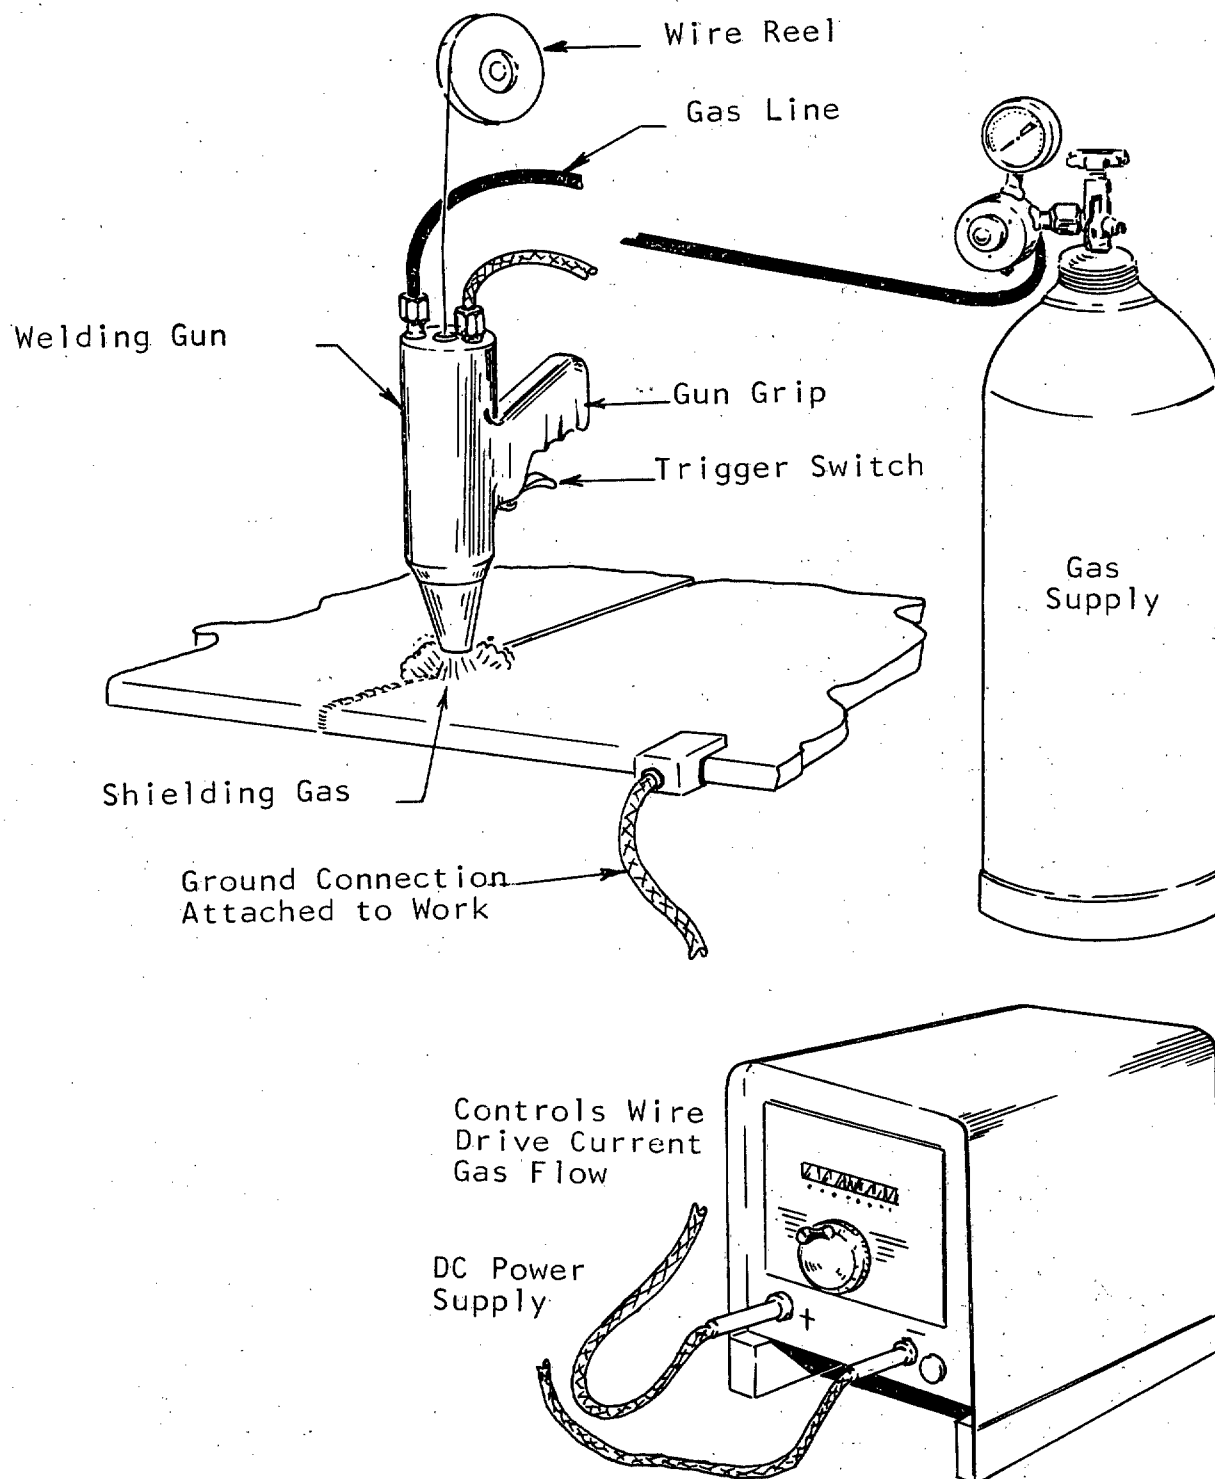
The Gas Metal-Arc (MIG) Welding Process
